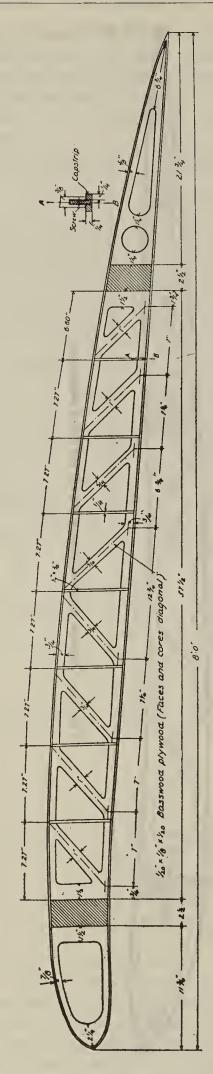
Plywood truss type wing rib for F5-L machine.
